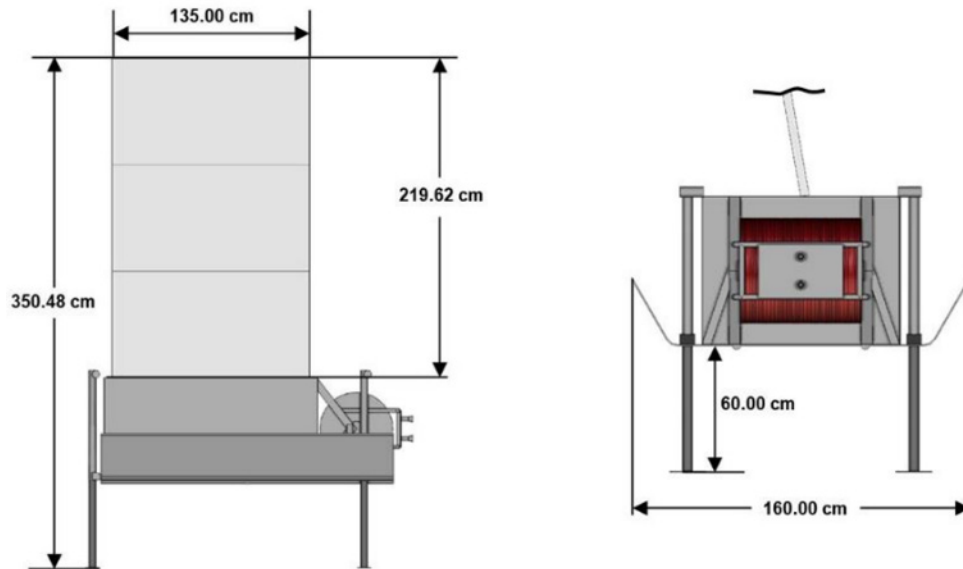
Deployed dimensions for the cable and spool systems element.
